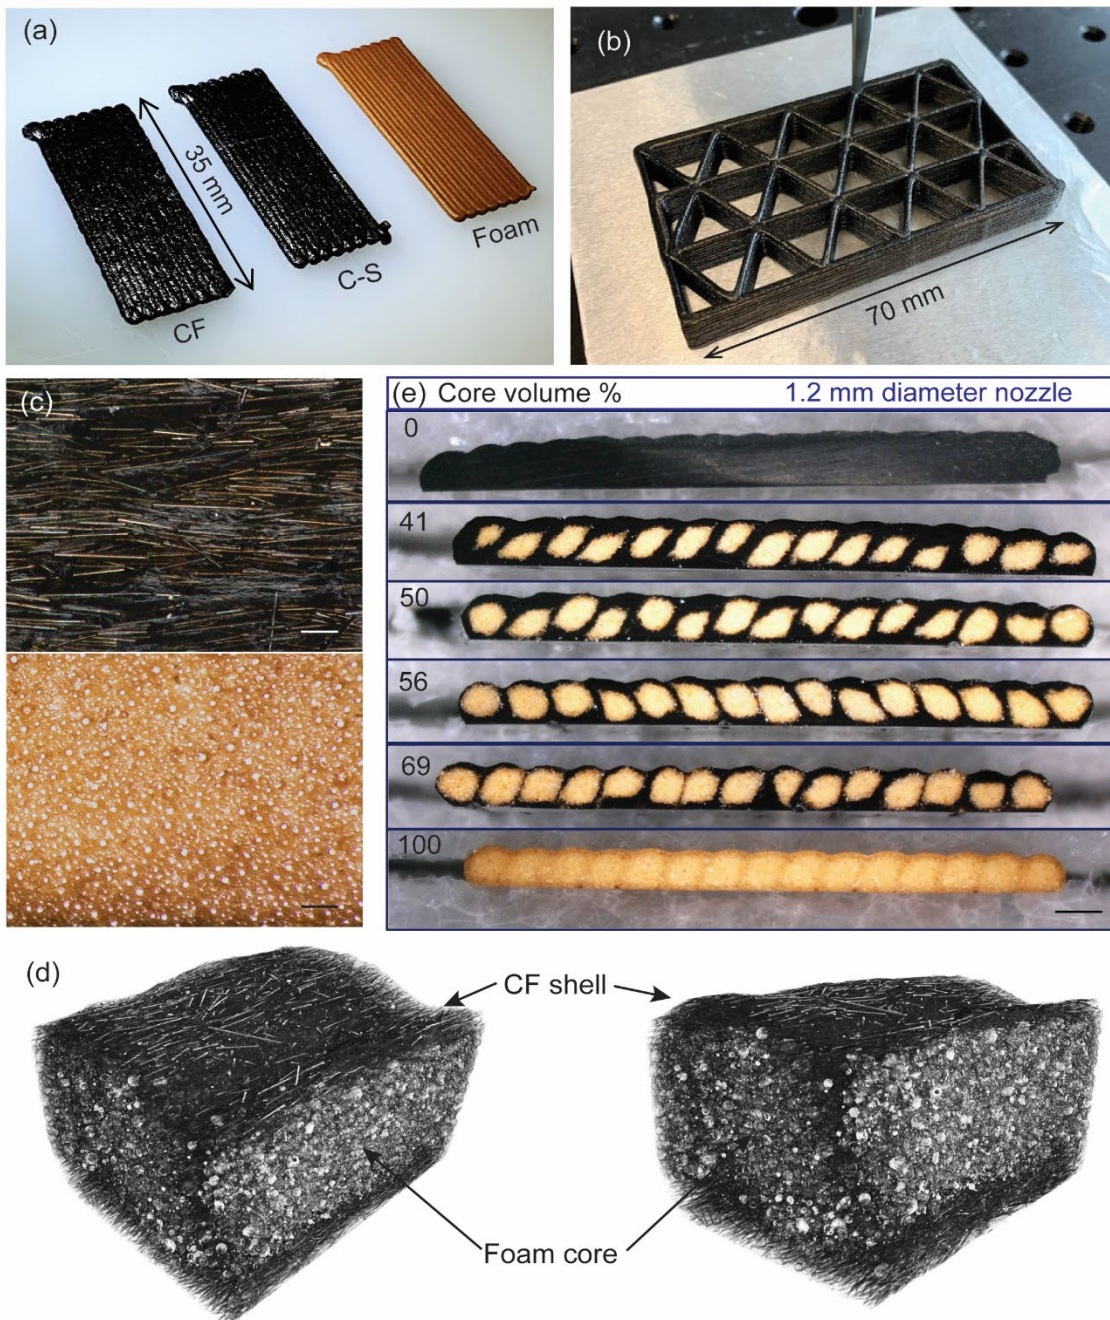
Printed C-S specimens. a) Single layer CF composite, C-S, and foam flexural samples. b) C-S printing of a lightweight triangular honeycomb structure. c) Micrographs of the top filament surface showing aligned CFs (100-400 μm length) and dispersed GMBs (20-80 μm diameter) in printed filaments. [Scale bar = 200 μm] d) X-ray CT 3D renderings of printed C-S samples. e) Cross-sectional micrographs of 1.2 mm C-S flexure samples. [Scale bar = 1 mm]
